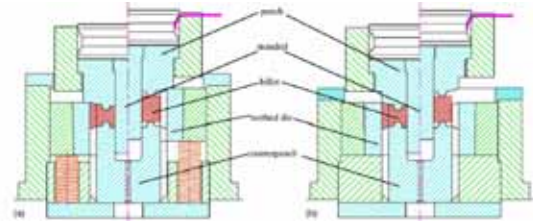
Schematics of gear forging tool designs with a chamfered punch and counter punch. (a) die is elastically attached to machine bed; (b) die is rigidly fixed to machine bed [13].
